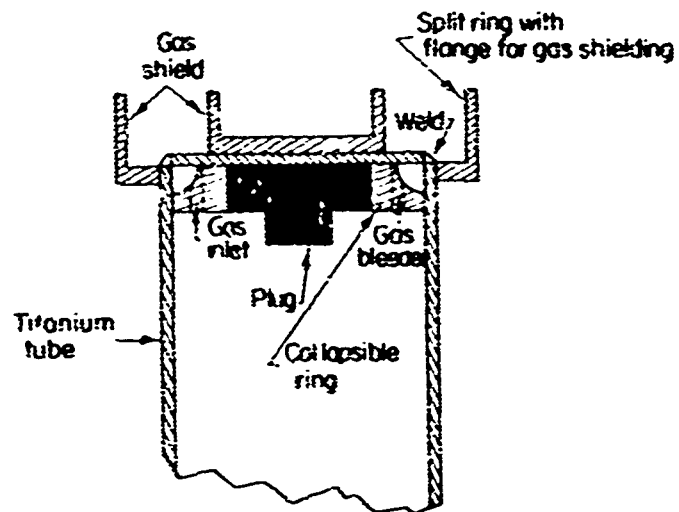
SHIELDING DEVICES FOR PROTECTING ROOT SIDES OF BUTT WELDS IN TUBING, PIPE, AND CYLINDERS
